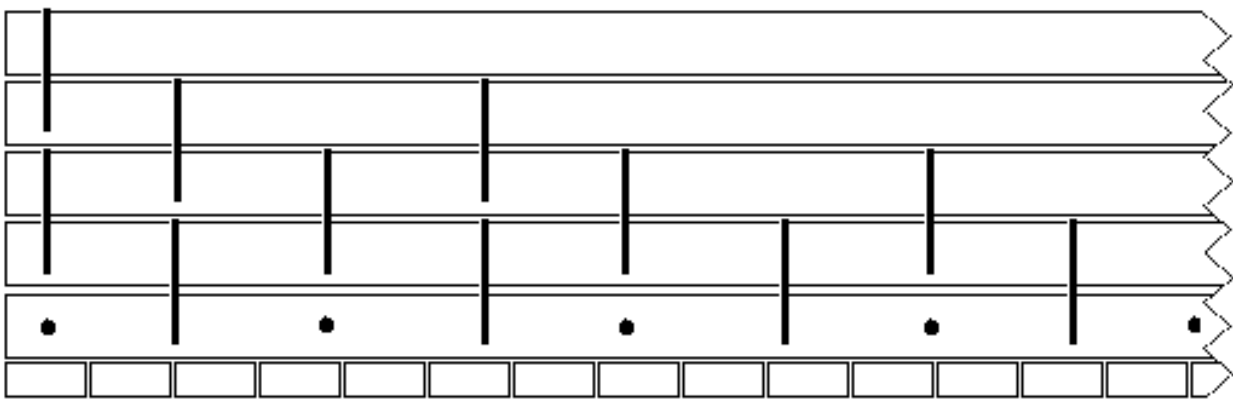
Reconstruction of 0051PQR's side construction and fastening pattern (Drawing by author 2020).
